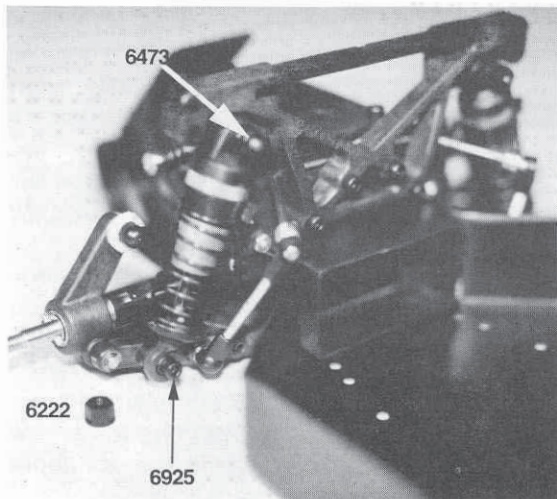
& 109 1) Go to bag #8-9 and remove the two #6927 4-40 x 3/4" socket head cap screws, two #6222 4-40/5-40 black nylon self threading locknuts, two #6925 4-40 x 1/2" socket head cap screws, and two #6473 nylon shock bushings. 2) (Fig. 108.) If you look at the back of the rear shock strut you will find four holes on each side. There are two vertical holes at the outer edge and two holes in about 1/2" from the outer edge (these are the shock mounting holes). Install the 4-40 x 3/4" screws into the outer of the two shock mounting holes from the back so that the threads are over the rear anti-roll bar. Do both sides. 3) Because of the limited amount of room, you will have to use your Allen wrenches, and you will need to install the lower end of the rear shock first. Use the 4-40 x 1/2" screws and slide them through the shock rod end and thread them into the outer hole of the rear suspension arm. You may have to pull the rear suspension arm down to give you enough room to turn the Allen wrench without hitting the chassis.
